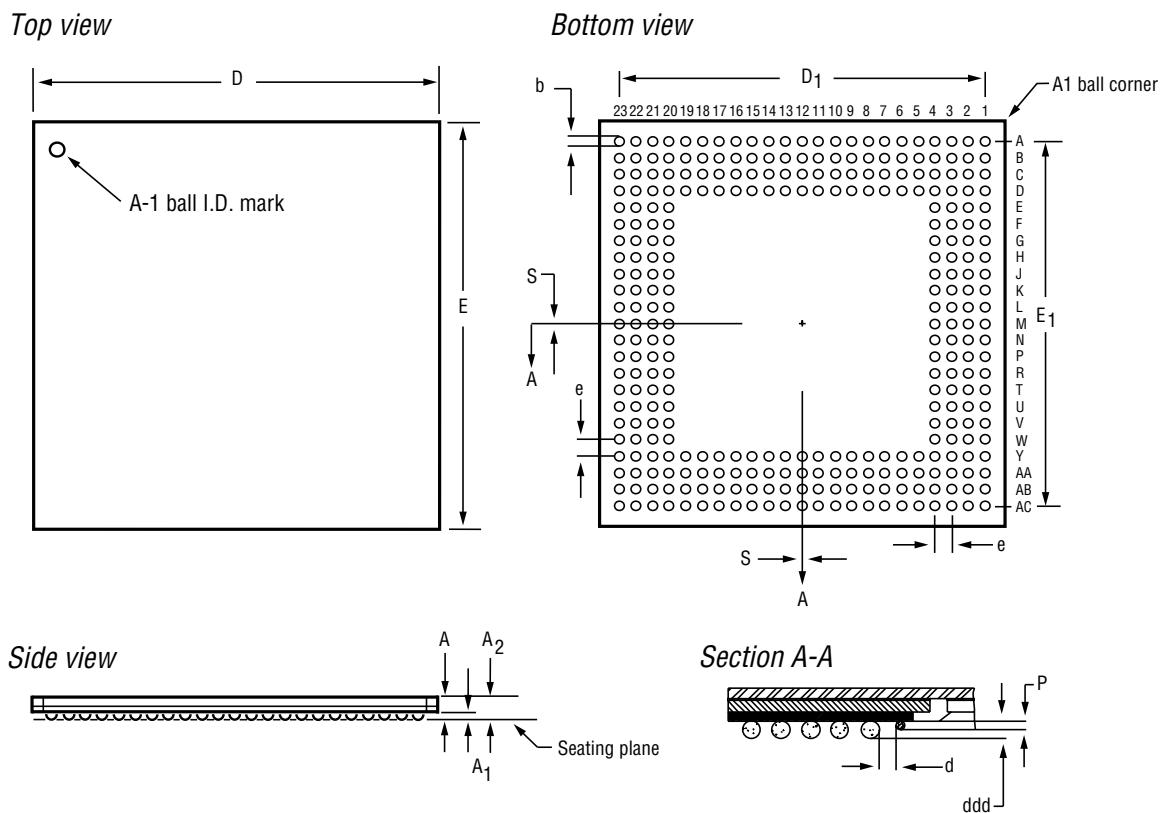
BGA Mechanical DimensionsTable 8. BGA Dimensions (in millimeters)
